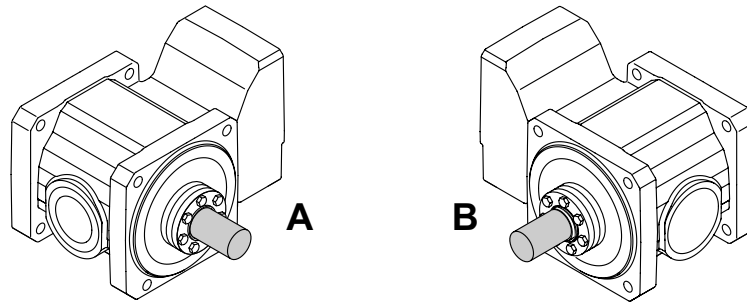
Position of output shaft and output flange for BSHF../I helical-bevel gear units 54672AXX
